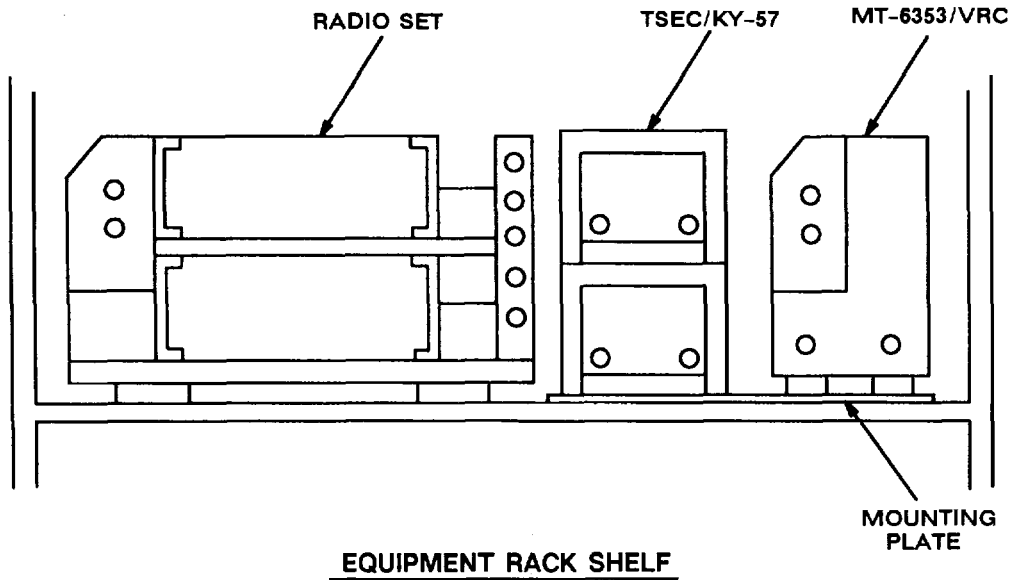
(2). MK and Radio Installation: Radio Equipment Locations
